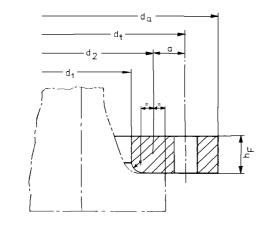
Welded-on collar (gasket not shown on drawing).
